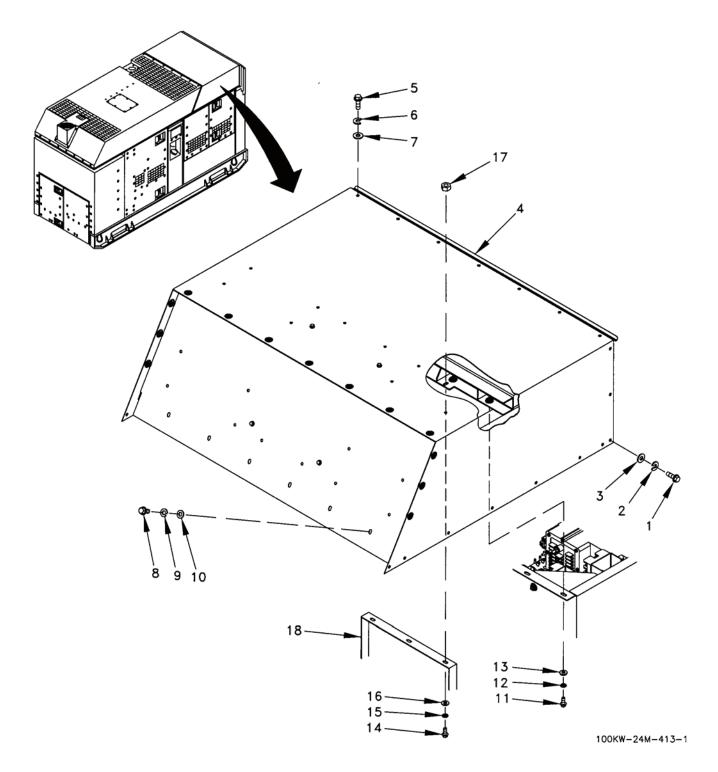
Rear Roof Section Housing Assembly (Sheet 1 of 2).
